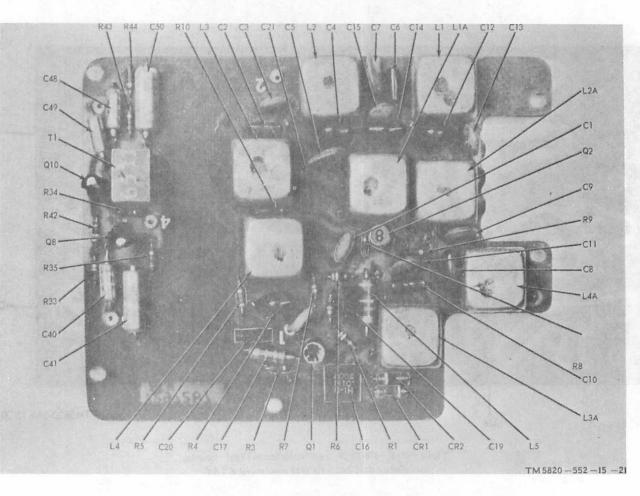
Parts locations, receiver assembly A4A7A2 (upper board).
